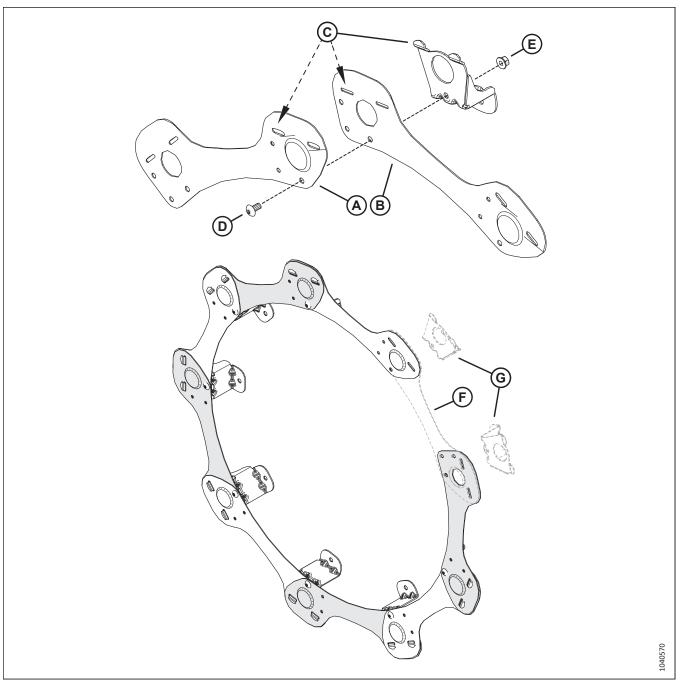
Nine-Bat Reel – Initial Endshield Assembly
